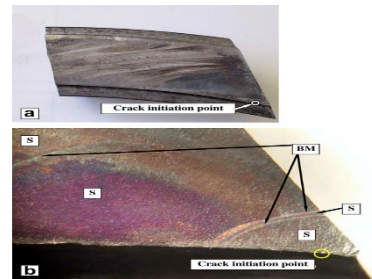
Detail of the L-0 blade fracture surface (unit 2). BM – beach marks, S – striations.
